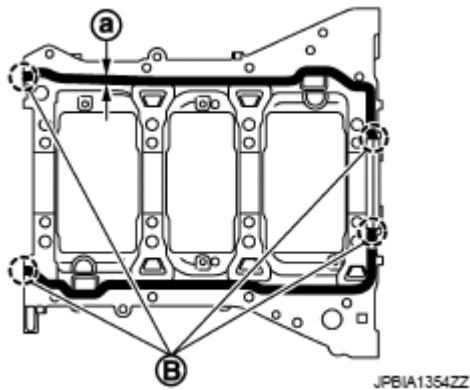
Identifying Lower Cylinder Block Sealant Area
